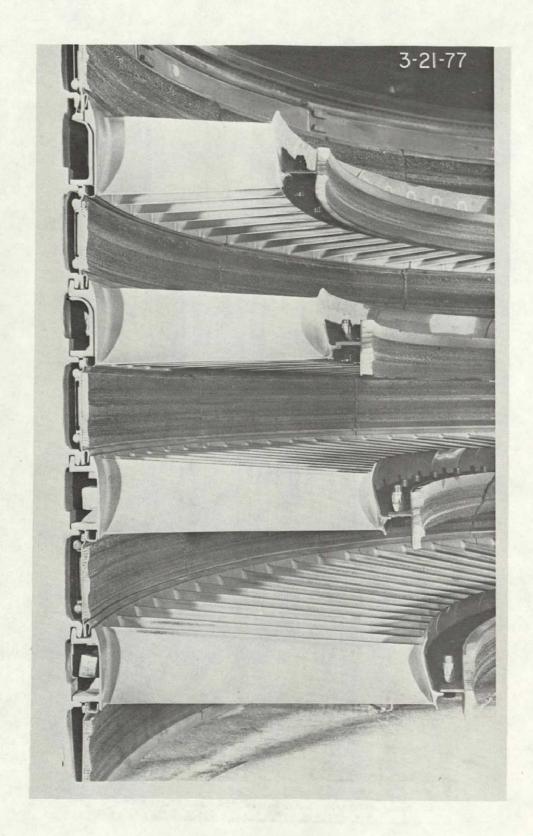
LP Turbine Stator Assembly, End View of Shroud and Seal Rubs.
